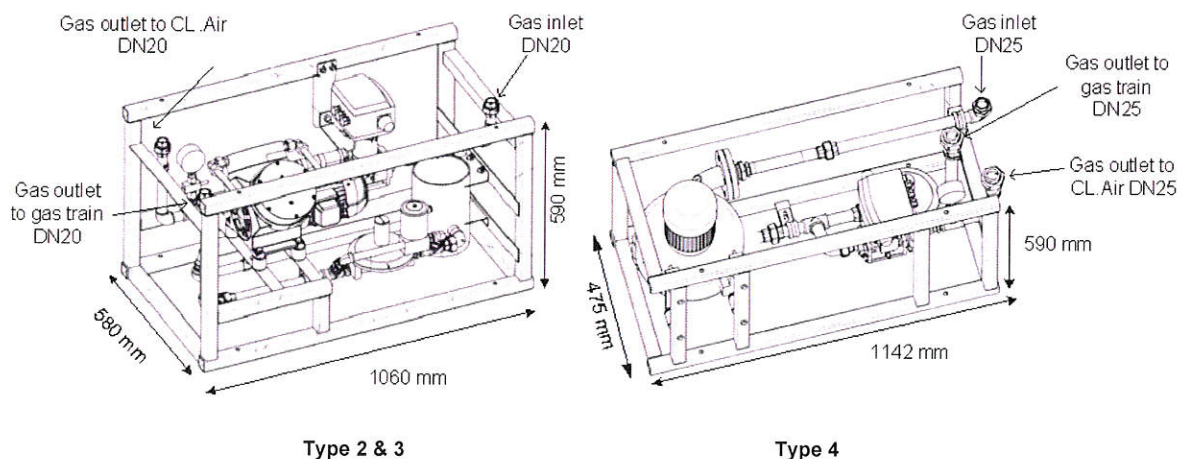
Gas injection unit for type 2 and 3 engines (left) and type 4 engines (right)
